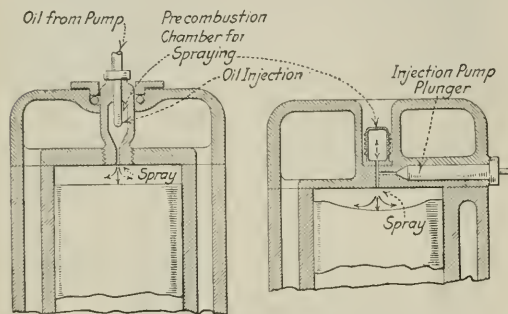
FIRST STEINBECKER COLD COMBUSTION CHAMBER
